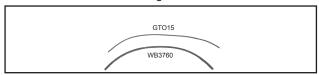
Cut the appropriate lenght of WB3760 Sleeving and GTO15 cable
